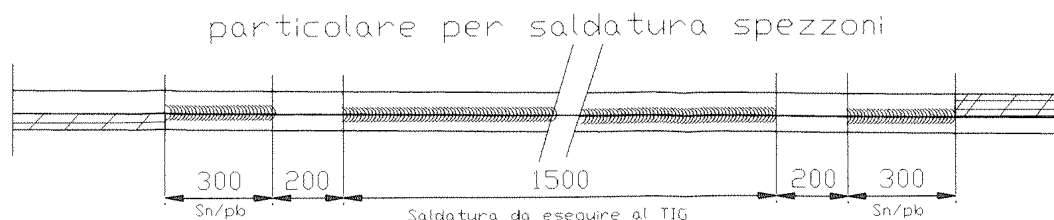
Internal splices (extracted from the original Ansaldo drawing): 1500 mm weld of aluminum edges + 200 mm gap + 300 mm solder of aluminum faces on both sides of the weld. The welding was done with the TIG (Tungsten Inert Gas) technique.
